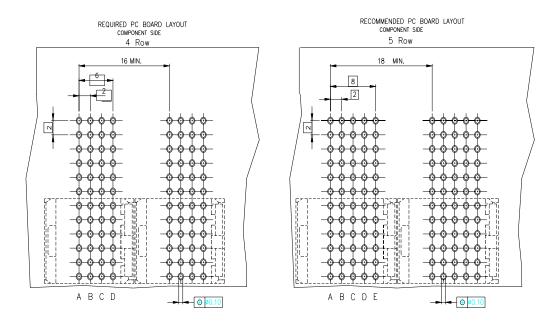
Required board layout for press fit vertical header. (All dimensions in mm)
